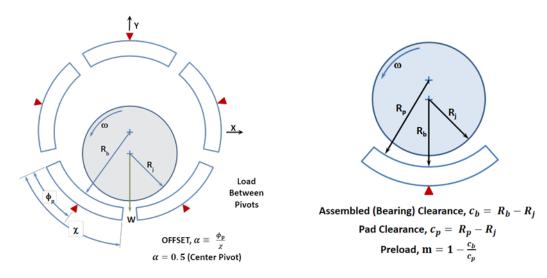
Geometry Definitions for Tilt Pad Bearing
